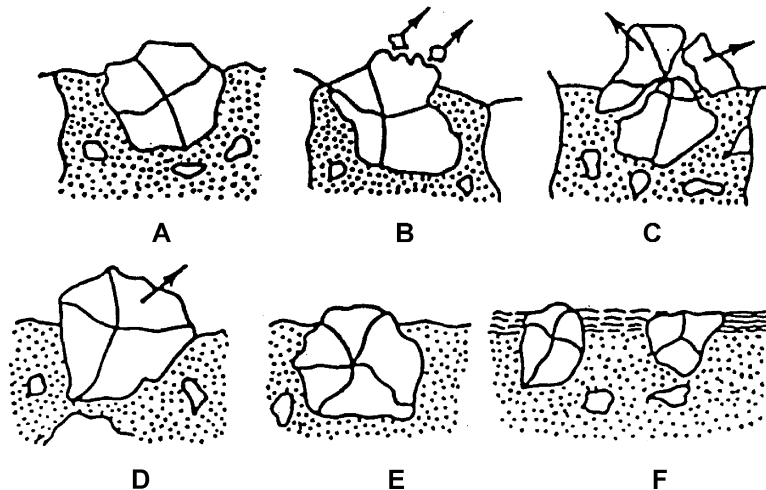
Basic forms of wear and damage on the grinding wheel grain.
